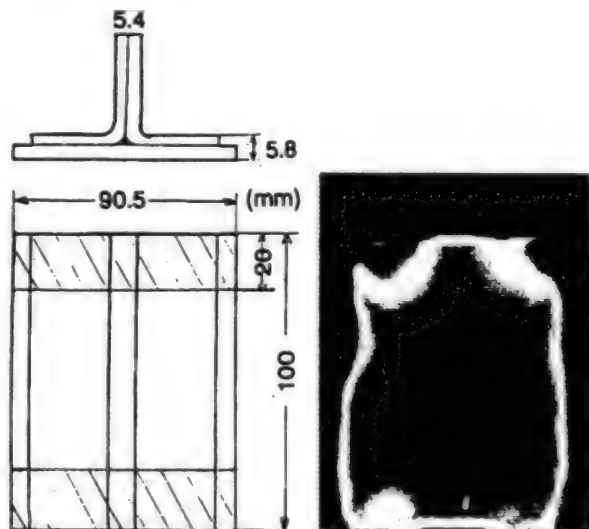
Dimensions of T-Shaped C/C Reinforced Material and Flaw Detection Result of Flange Part (Hatched part is reinforced part at the end)
